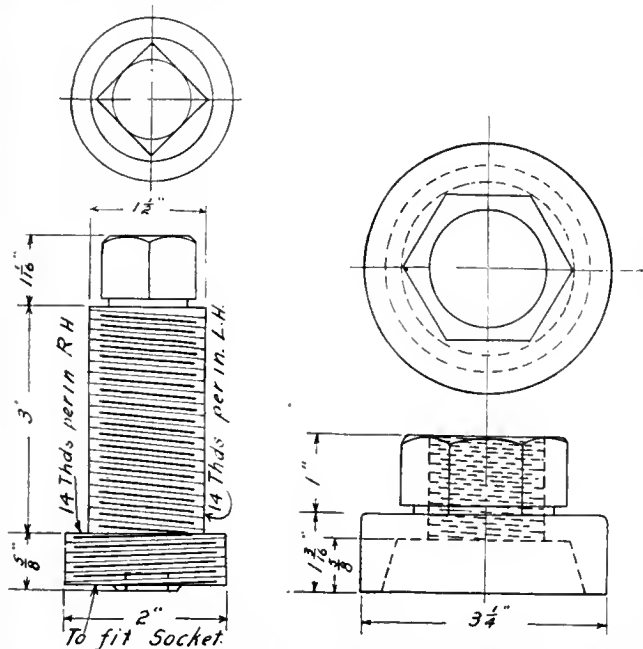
STUD AND NUT FOR SHELL SOCKET TOOL.
